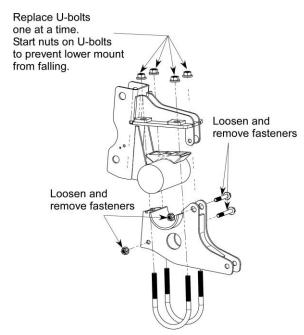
Loosening and removal of fasteners. Axle Cradle shown lowered for clarity.
